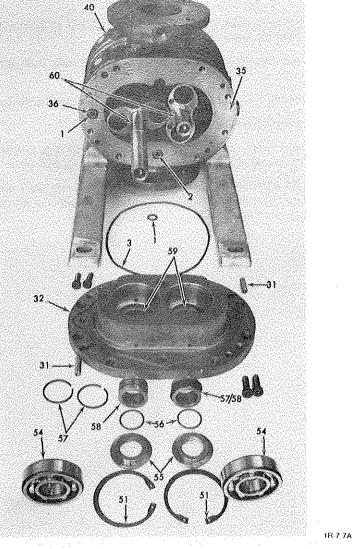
Using Jackscrews and Plates to Remove the Rear End Plate (WA-250 pump model shown).
